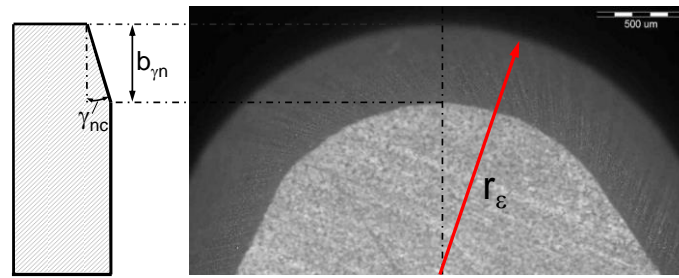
Geometry of the cutting tool insert used – $r_e = 0.8$ mm,
